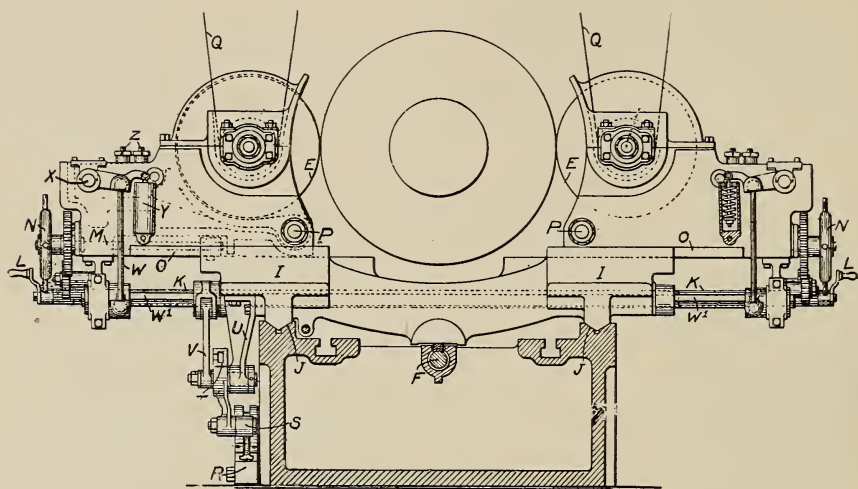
SECTION THROUGH THE BOWEN ROLL GRINDER.
